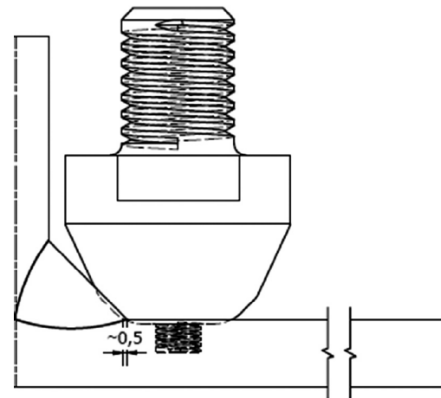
Schematic representation of the position of the tool relative to the weld (dimensions in mm).
